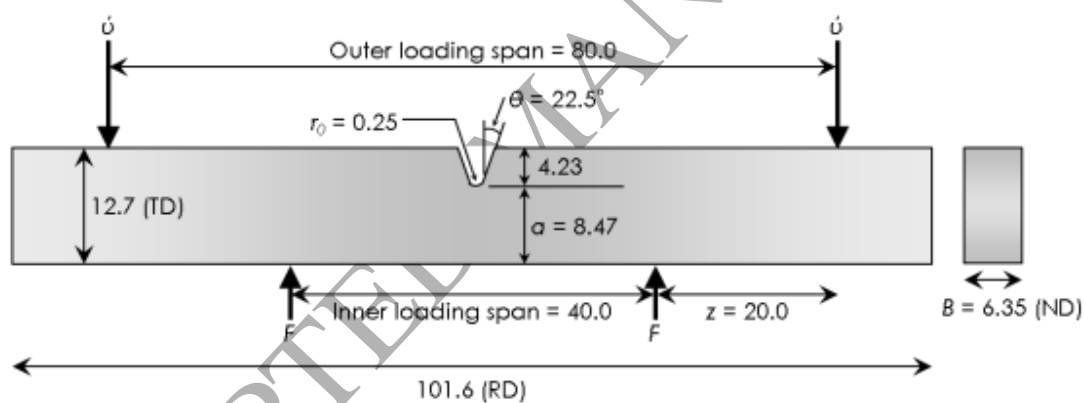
Dimensions of a single-edge notch bend specimen in millimeters.
